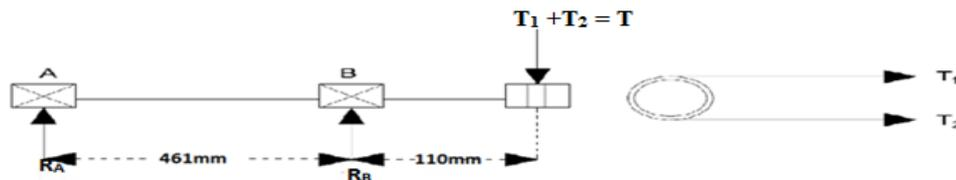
Free Body Diagram of Shaft and Bearing Arrangement
